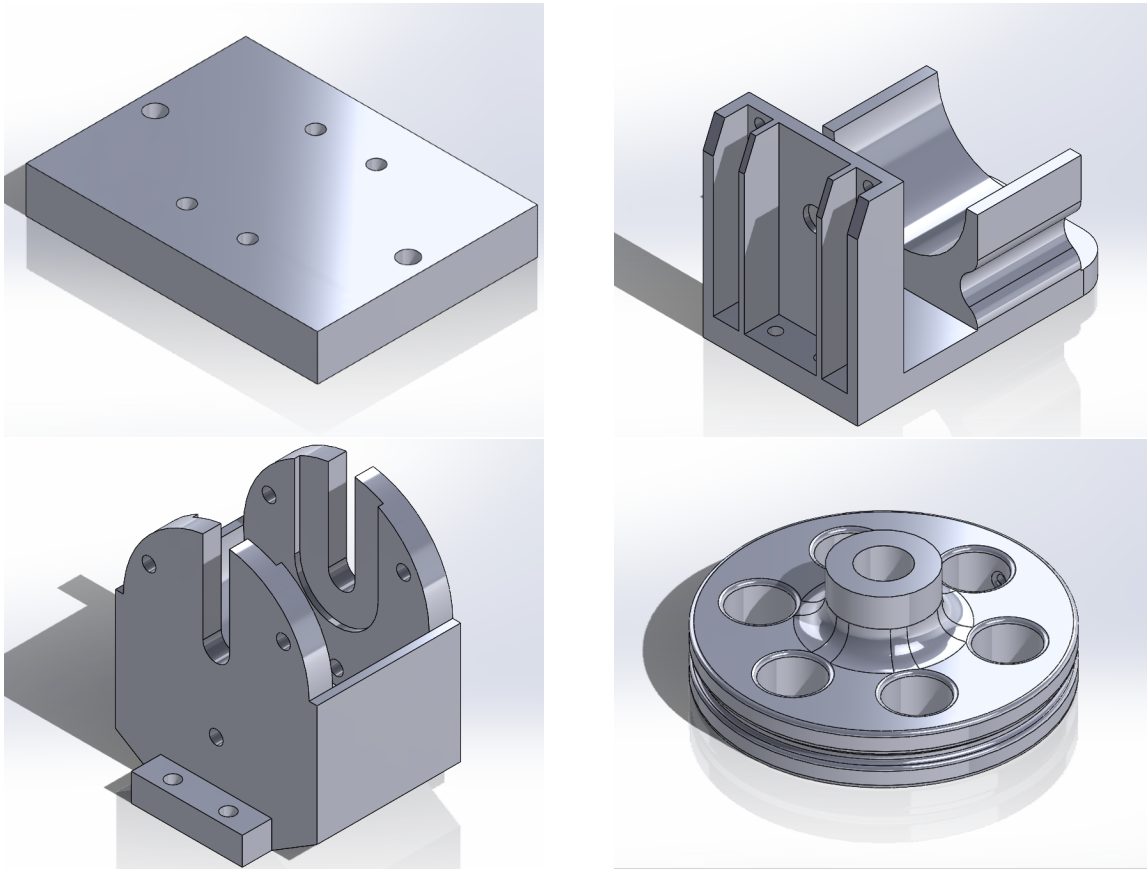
Computer-aided drawings of, from top to bottom, and then left to right: the torque sensor mount; the DC motor mount; the MR brake mount; and the load pulley.
